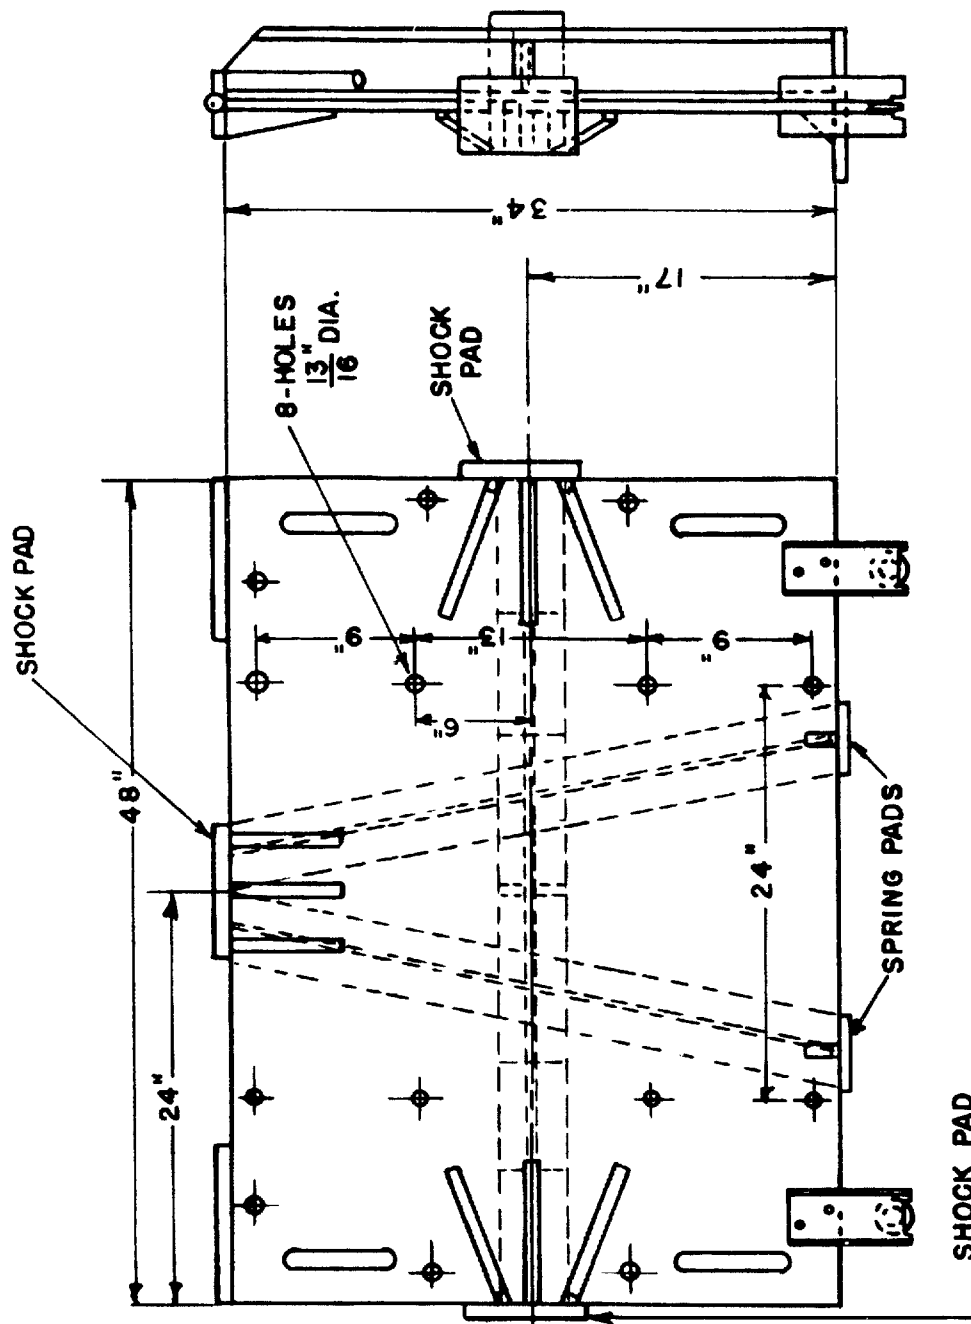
Anvil plate of shock-testing machine for light-weight equipment.
